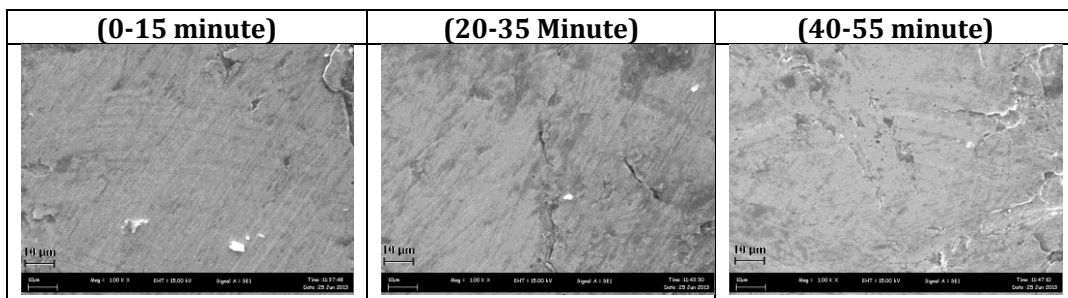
Surface profiles after machining FC300 at the cutting speed of 77 m/min.
